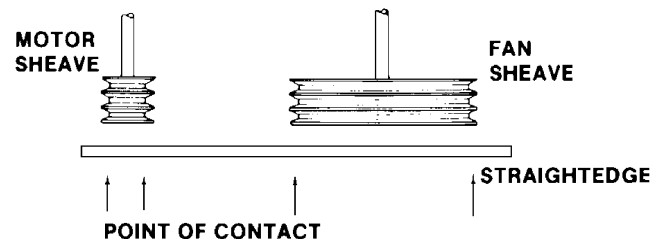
CHECKING SHEAVE ALIGNMENT
